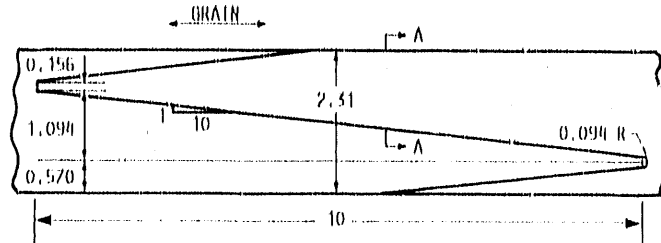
Tensile test specimens showing details of machined fingers with slopes of 1:6, 1:8, 1:10, and 1:14. (Dimensions are in inches.)
